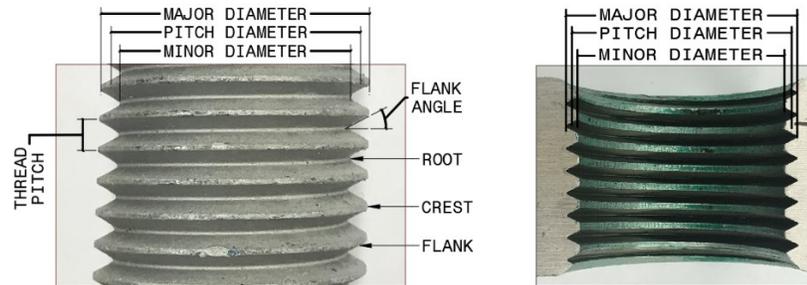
Thread Terminology for the bolt (left) and nut (right)
